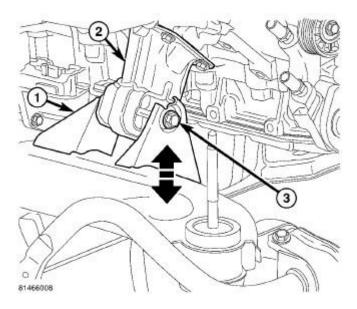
ENGINE MOUNT BOLT Courtesy of CHRYSLER LLC
